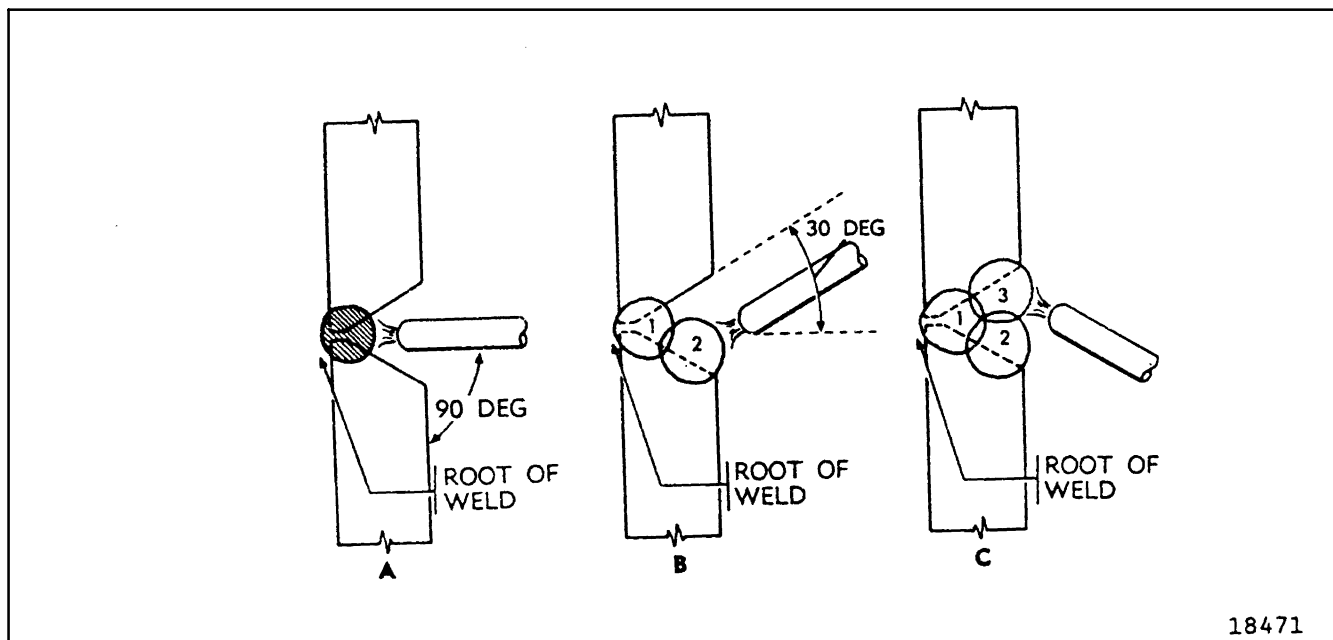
Welding Butt Joint on Vertical Plates
